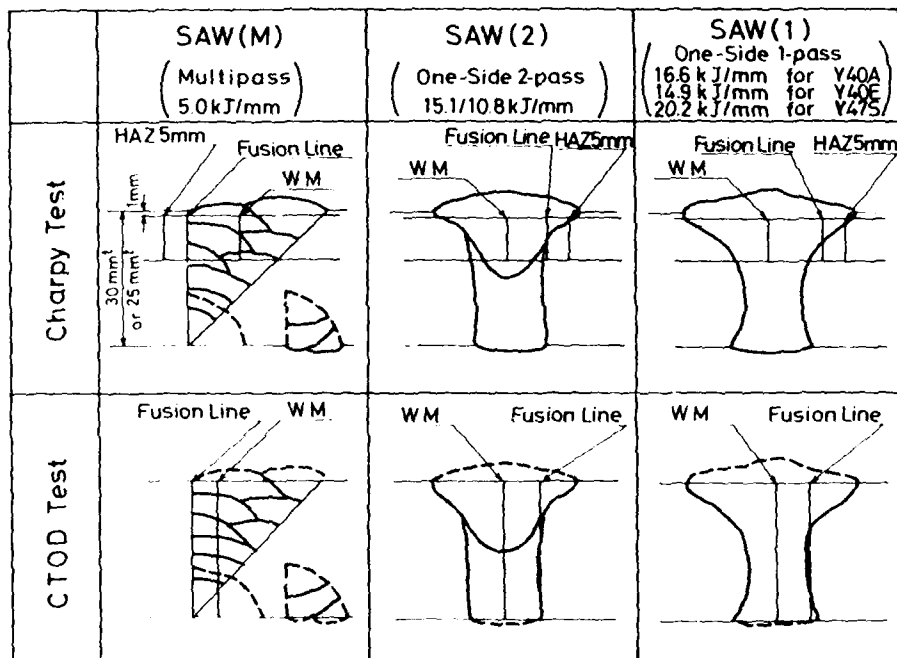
Schematic drawings of welded joints and notch positions of CVN impact and CTOD test specimens
